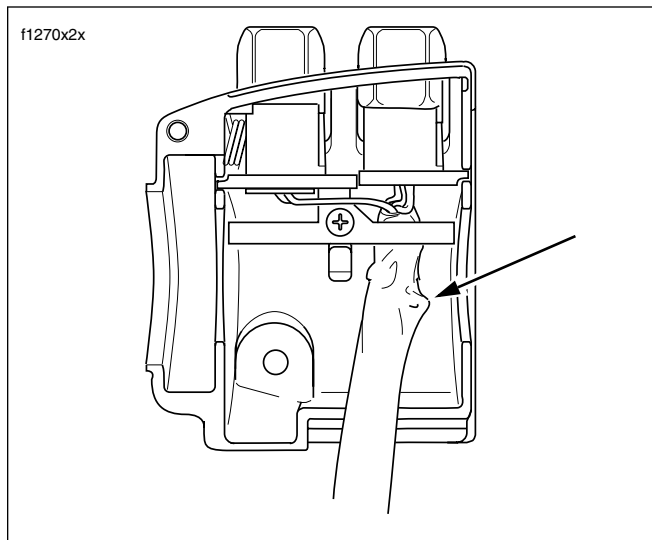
Run/Stop Switch Wiring in Upper Right Hand Control Housing
